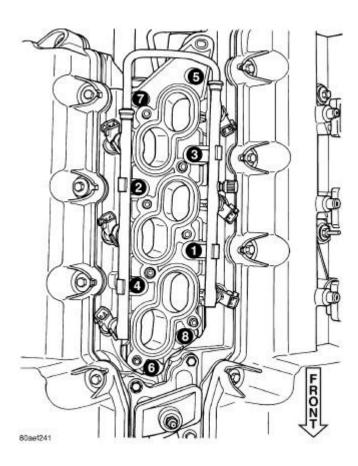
Lower Intake Manifold Tightening Sequence Courtesy of CHRYSLER LLC
